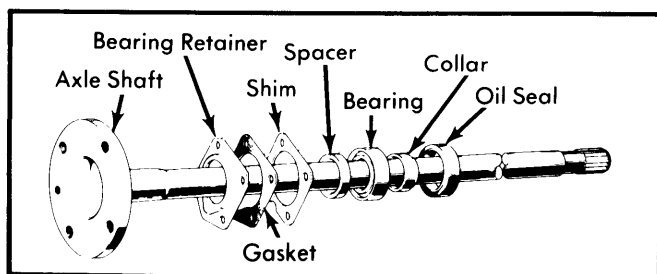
Exploded View of Axle Shaft Assembly (Except Pickup)
